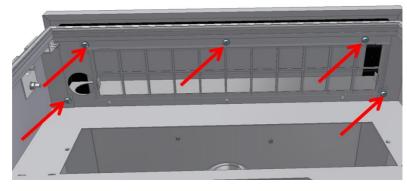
Mounting screws on storage cabinet cover – view from front and below
